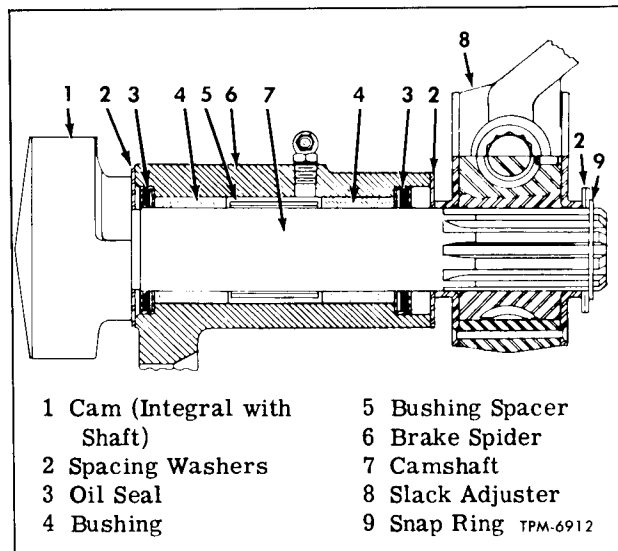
Front Brake Camshaft and Slack Adjuster Mounting
